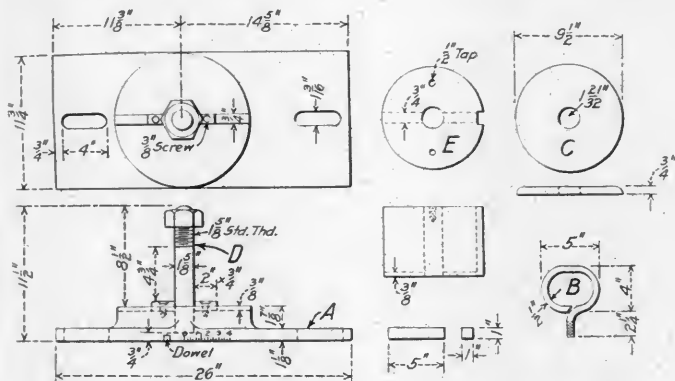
Mandrel for Turning Eccentrics on a Boring Mill
